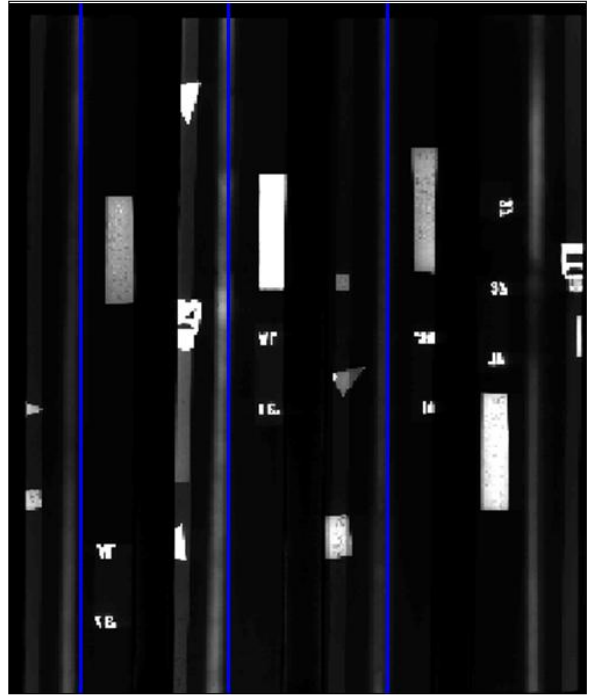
Summary of results of Threshold based method (a) Welds in image 1; (b) Welds in image 2; (c) Welds in image 3; (d) Welds in image 4
